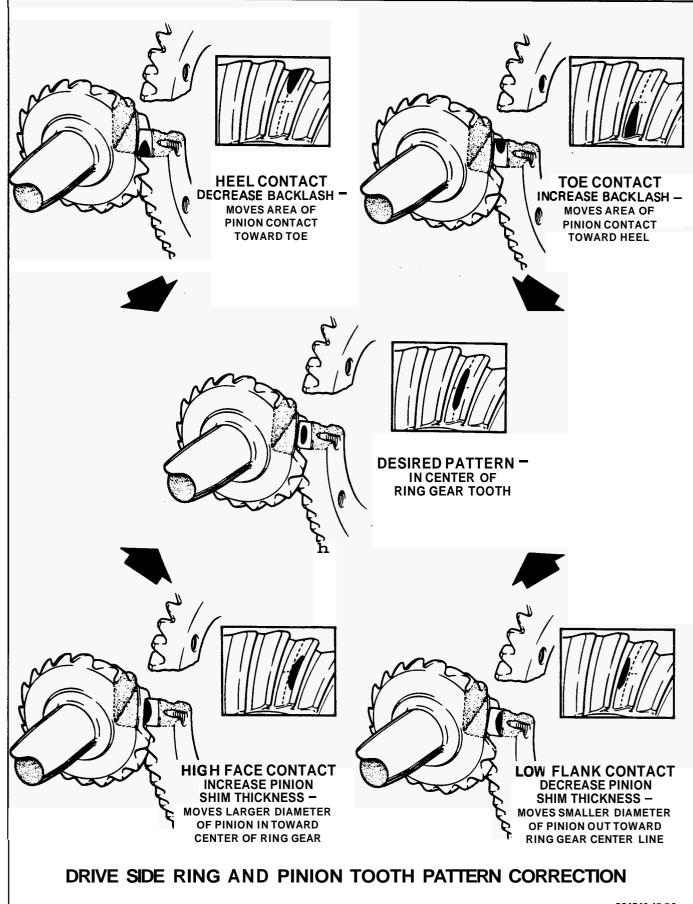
Gear Tooth Contact Pattern and Adjustments Affecting Tooth Contact.
